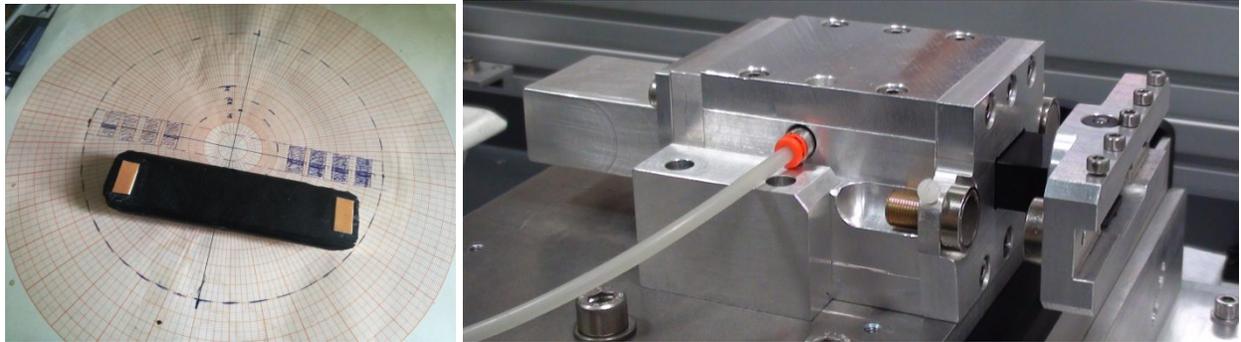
(A) The 3M™ Trizact™ Hookit™ Film Disc 268XA pad TO is fixed at the edge of a pitch tool with bi-adhesive layers. (B) The pitch tool is held by an air bearing carriage: the pressure is regulated changing the distance of magnets.
